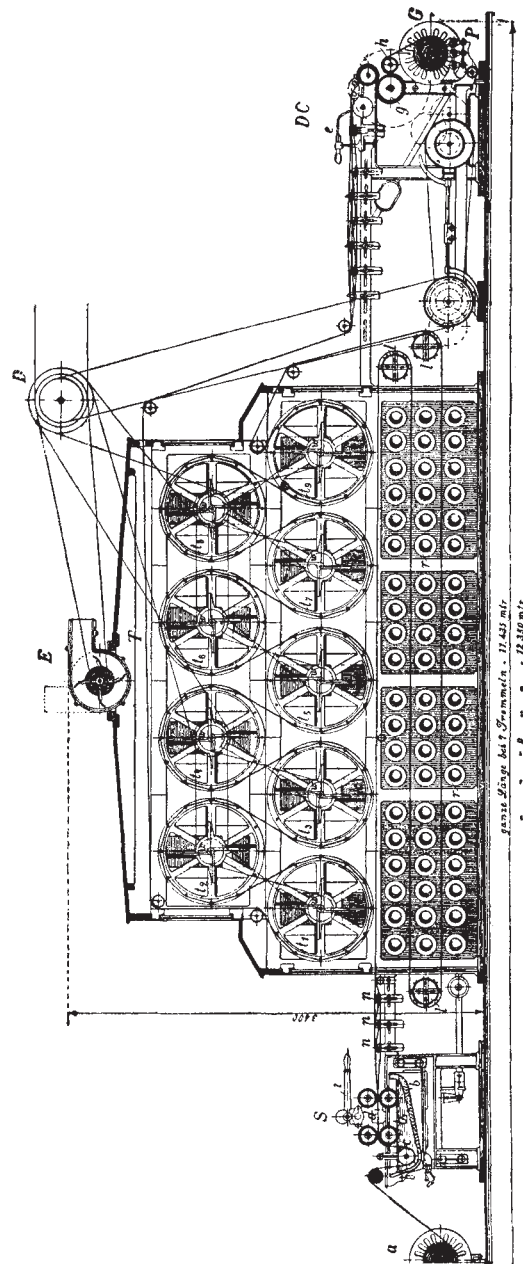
SUCKER HOT AIR-DRYING SLASHER SIZING MACHINE.
